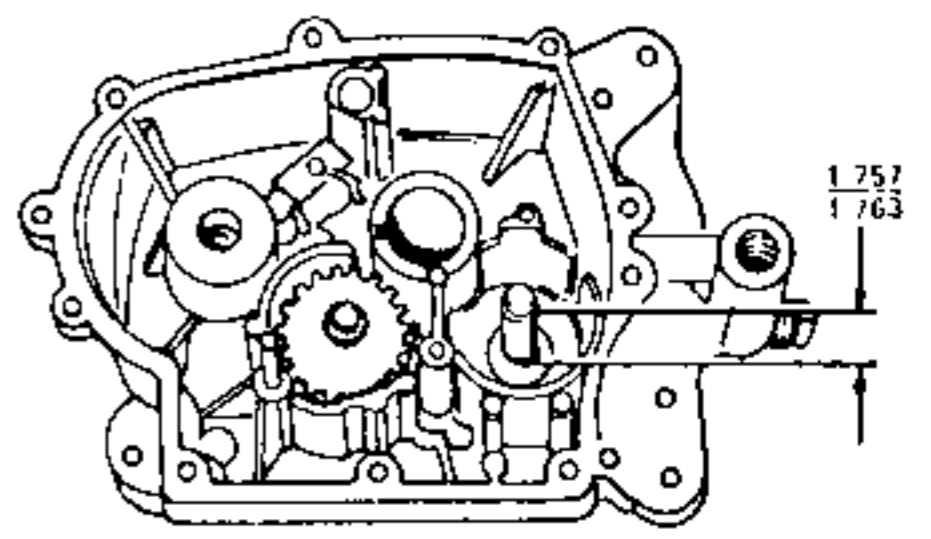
On Models HM80, VM80, HM100 and VM100, balancer gear shafts must be pressed into cover or engine base so a distance of 1.757-1.763 inches (44.628-44.780 mm) exists between shaft bore boss and edge of step cut as shown.
